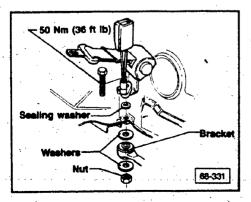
Rear seat belt, left, inner attachment (with retractor), removing/installing
